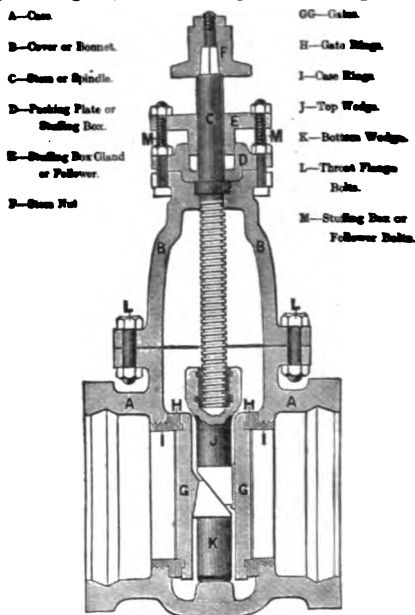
Ludlow Bronze Mounted Double Gate Valve With Bolted Stuffing Box.
